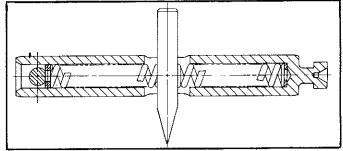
Clutch Actuator Rod with One Additional Shim Washer Added to Each End
